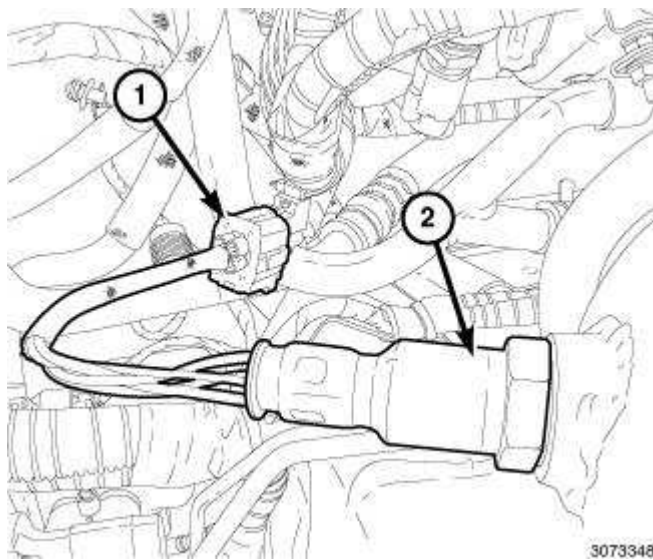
Upstream Oxygen Sensor & Electrical Connector
